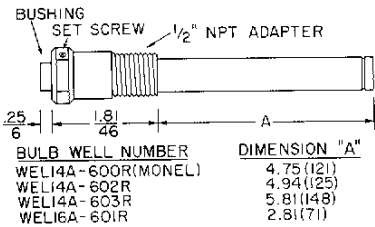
Bulb well for liquid immersion applications where a temperature bulb may be removed without draining tank.
